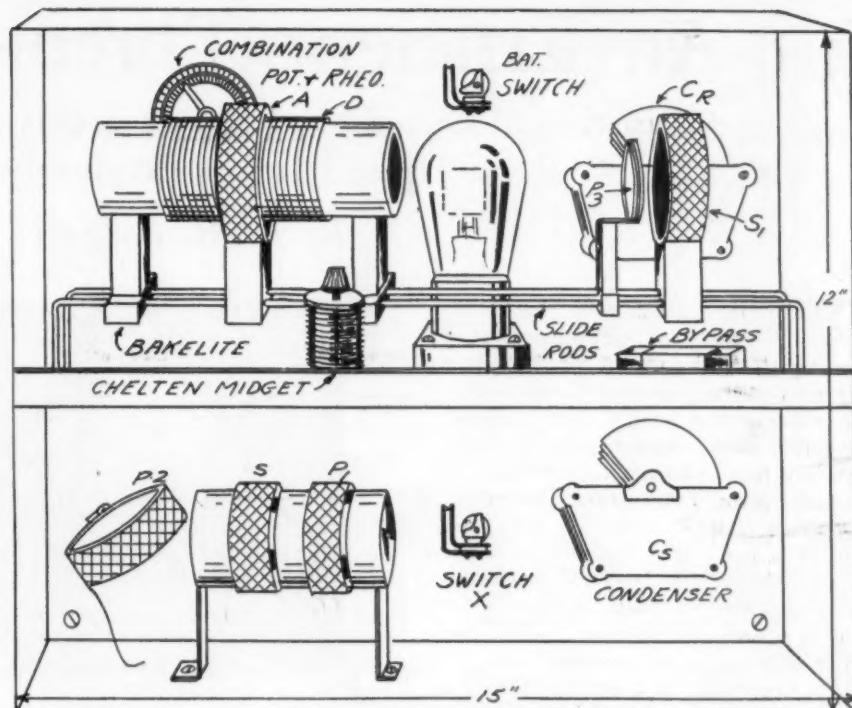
Rear View of Anti-Static Instrument Assembly.
